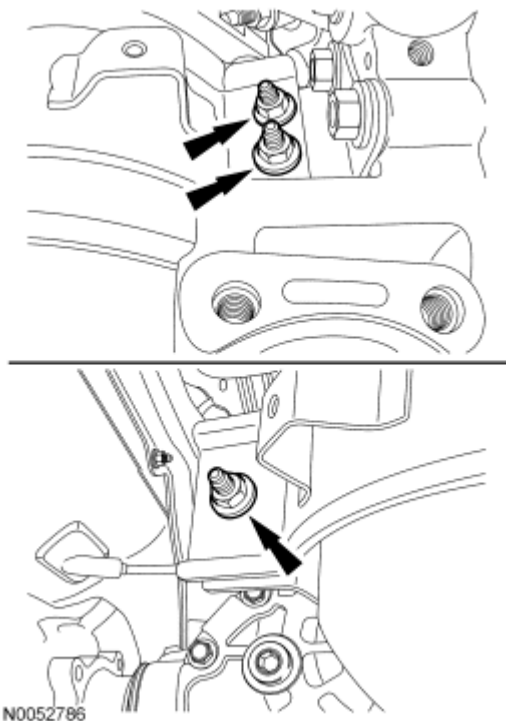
Locating RH Exhaust Heat Shield Bracket Nuts - Inboard Half
